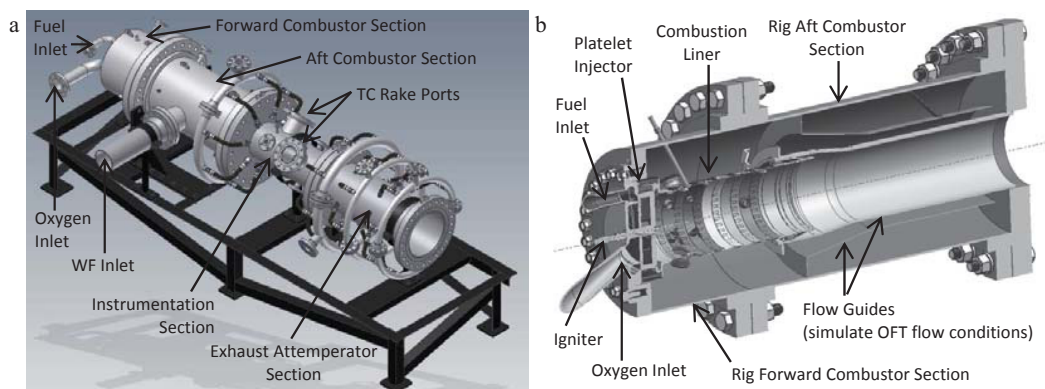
Solid models of the OFT-900 single-can RH test rig (a) complete test stand; (b) mid-section cutaway of combustor sections
